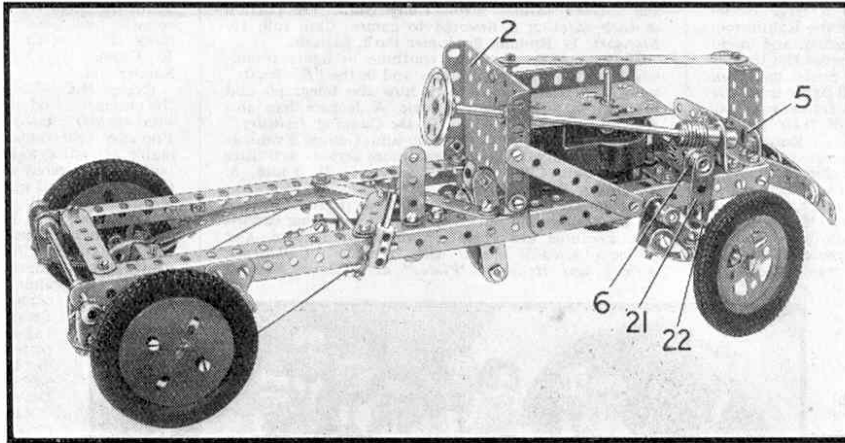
A Motor Chassis that is simple but complete in all main details.
